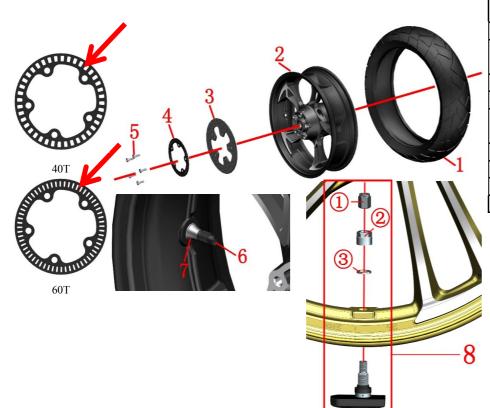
REAR WHEEL		Rear wheel component 2	СНК	0
